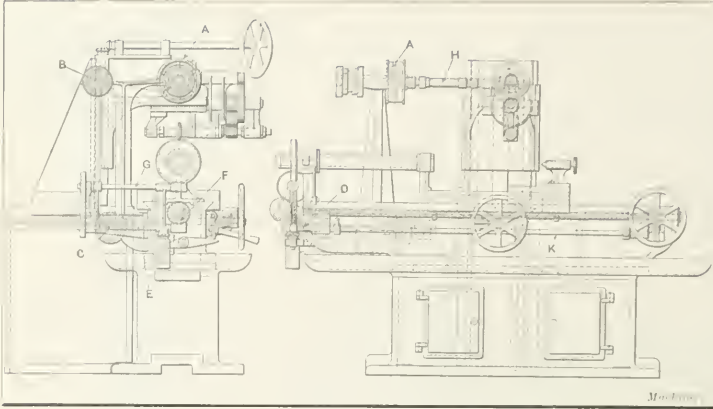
End View and Front Elevation of Bowen Milling Machine
